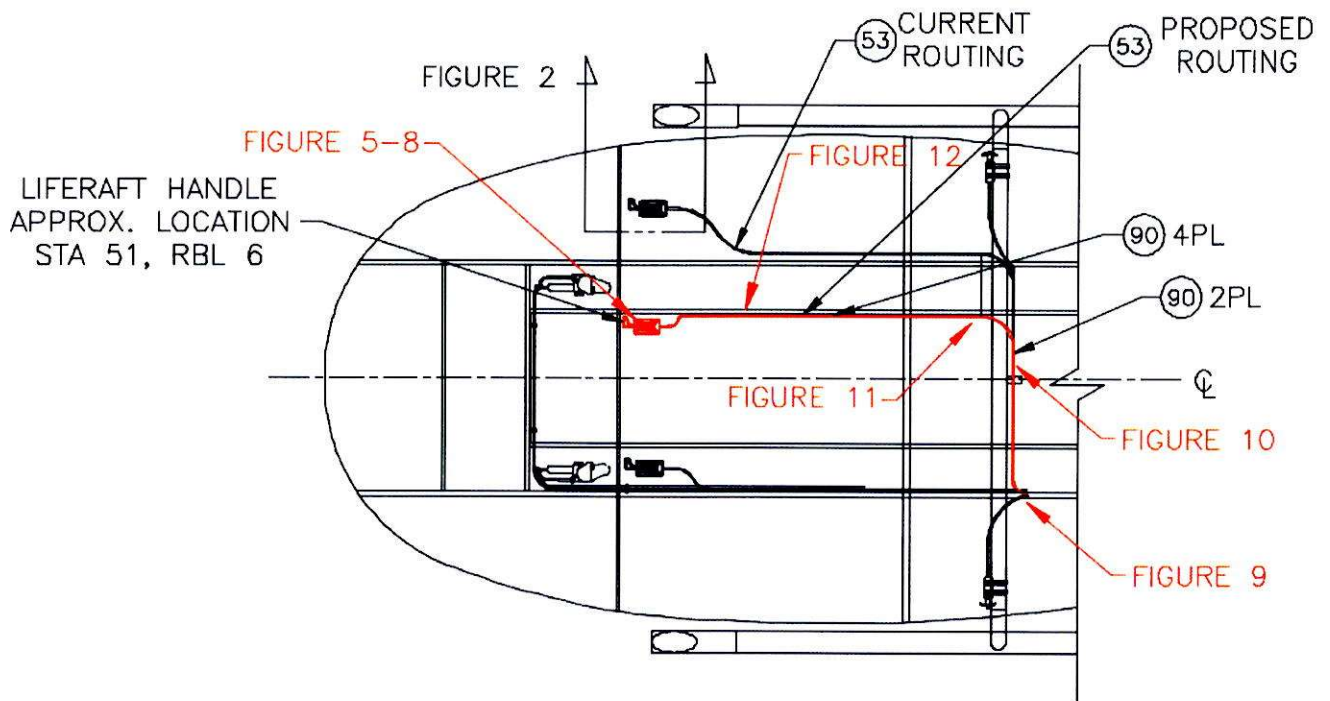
NEW CABLE ROUTING LOCATION W/ NEW HANDLE LOCATION
